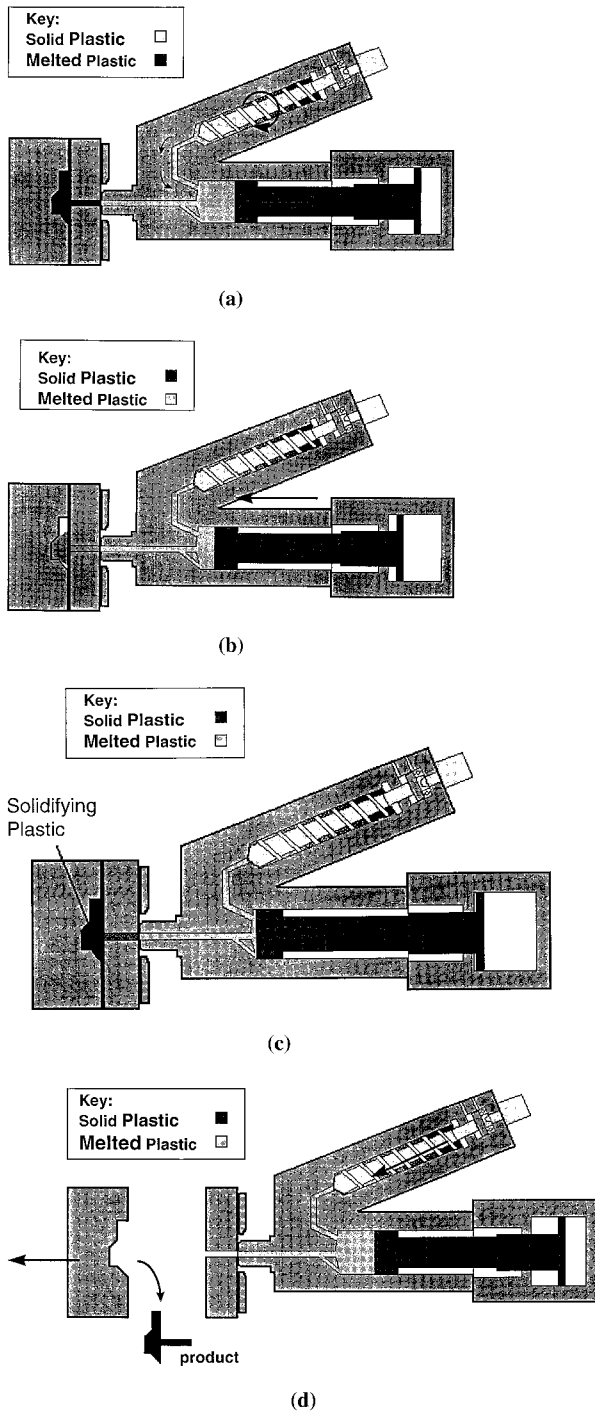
Preplastication IM machine process showing (a) the plasticizing and charging phase, (b) the filling phase, (c) the holding phase, and (d) the sealing and ejection phase.
